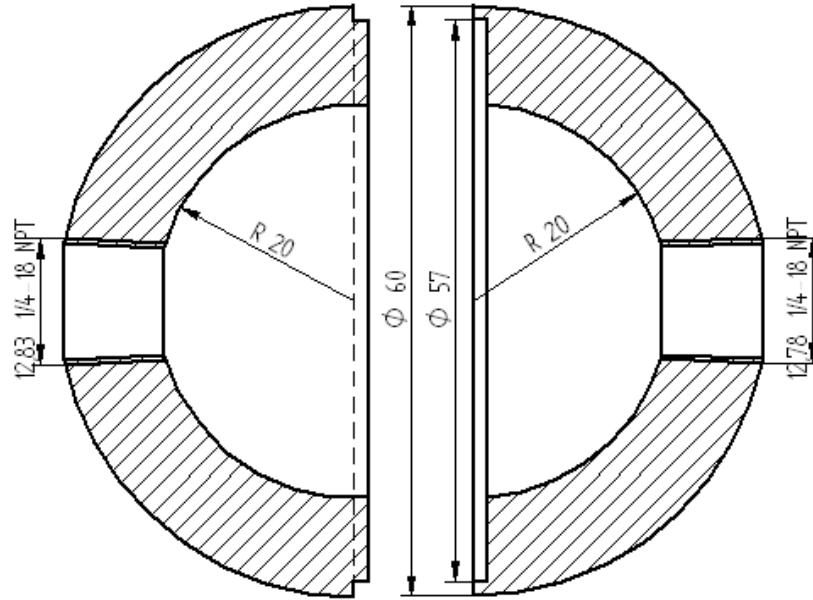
Technical Drawing of the Shpere used in the Free&Forced Condensation Experiments.
